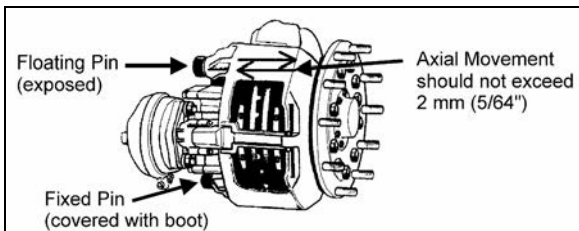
CALIPER AXIAL MOVEMENT 12132
